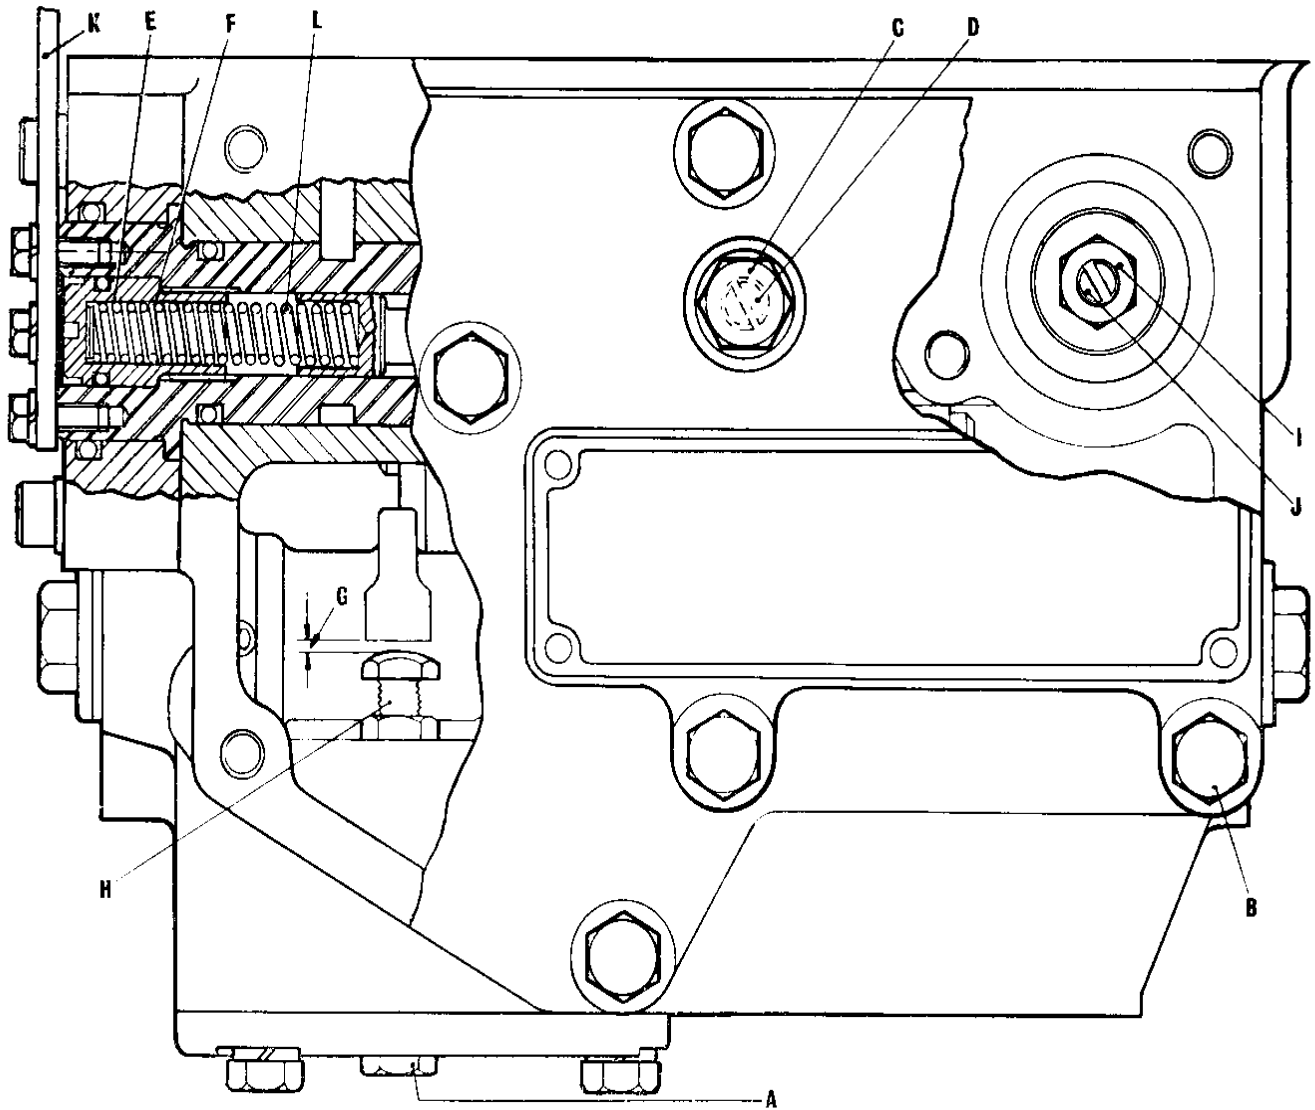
Lister Reverse Gear—LH150 Hydraulic operated, Control adjusting
